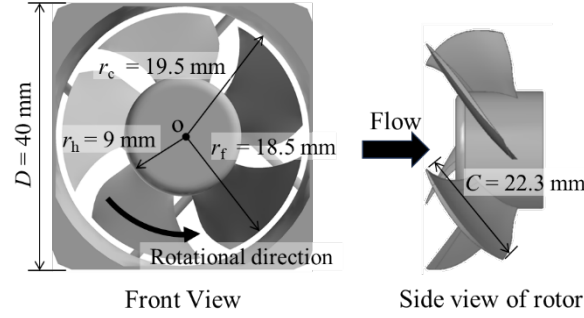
Axial fan with five rotor blades housed in casing with four struts.
